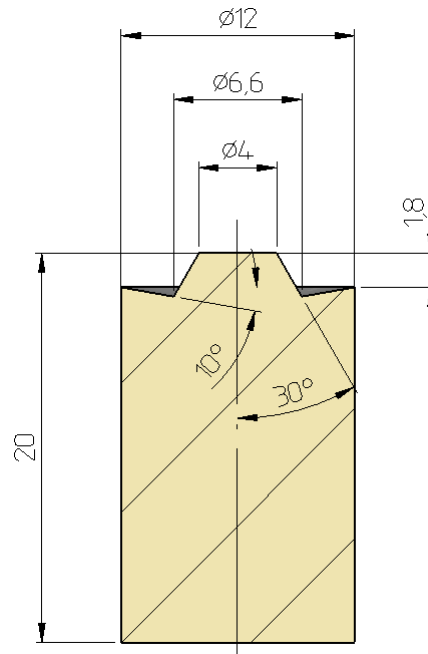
Drawing of a demanded tool for friction stir welding.
